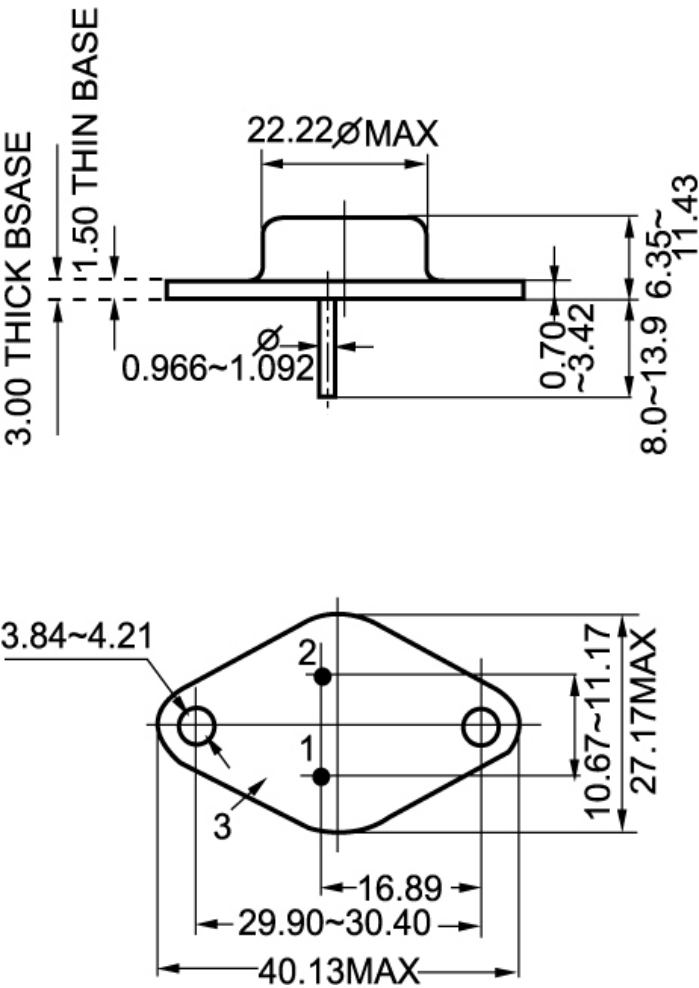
outline dimensions (unindicated tolerance:±0.1mm)
